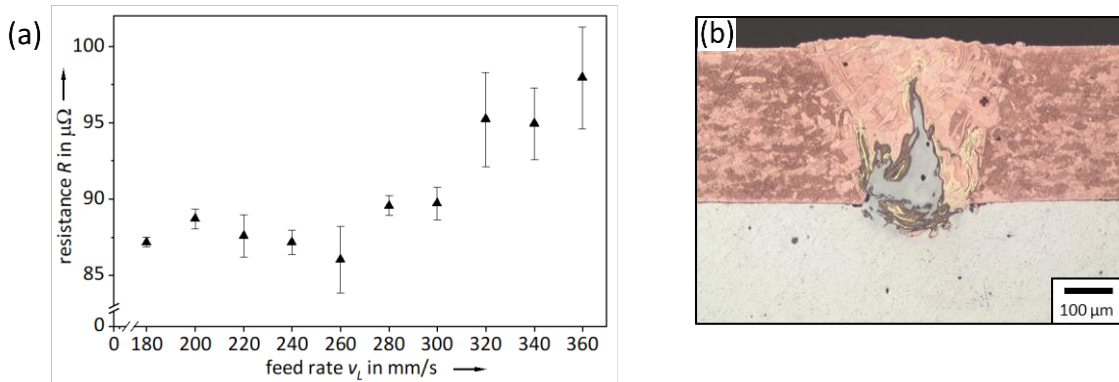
(a) Electrical resistance over the feed rate and (b) metallographic cross-section of a weld seam for $P_L = 1000$ W and $v_L = 260$ mm/s
